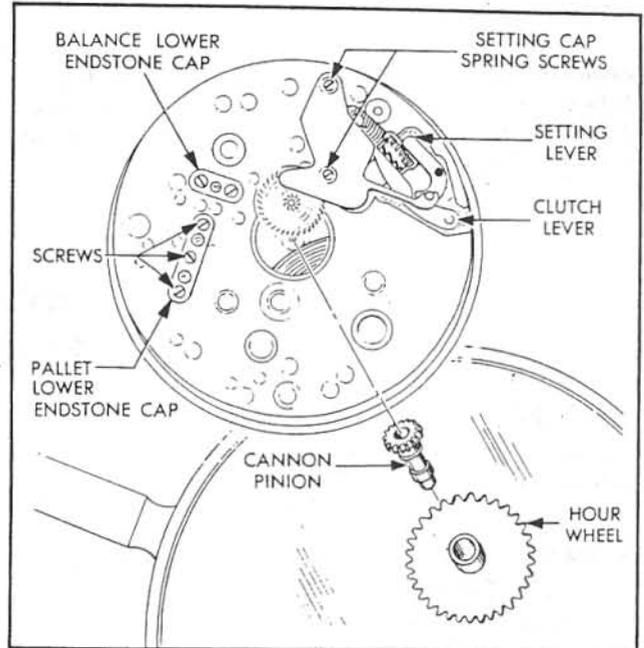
Assembly of Cannon Pinion and Hour Wheel
